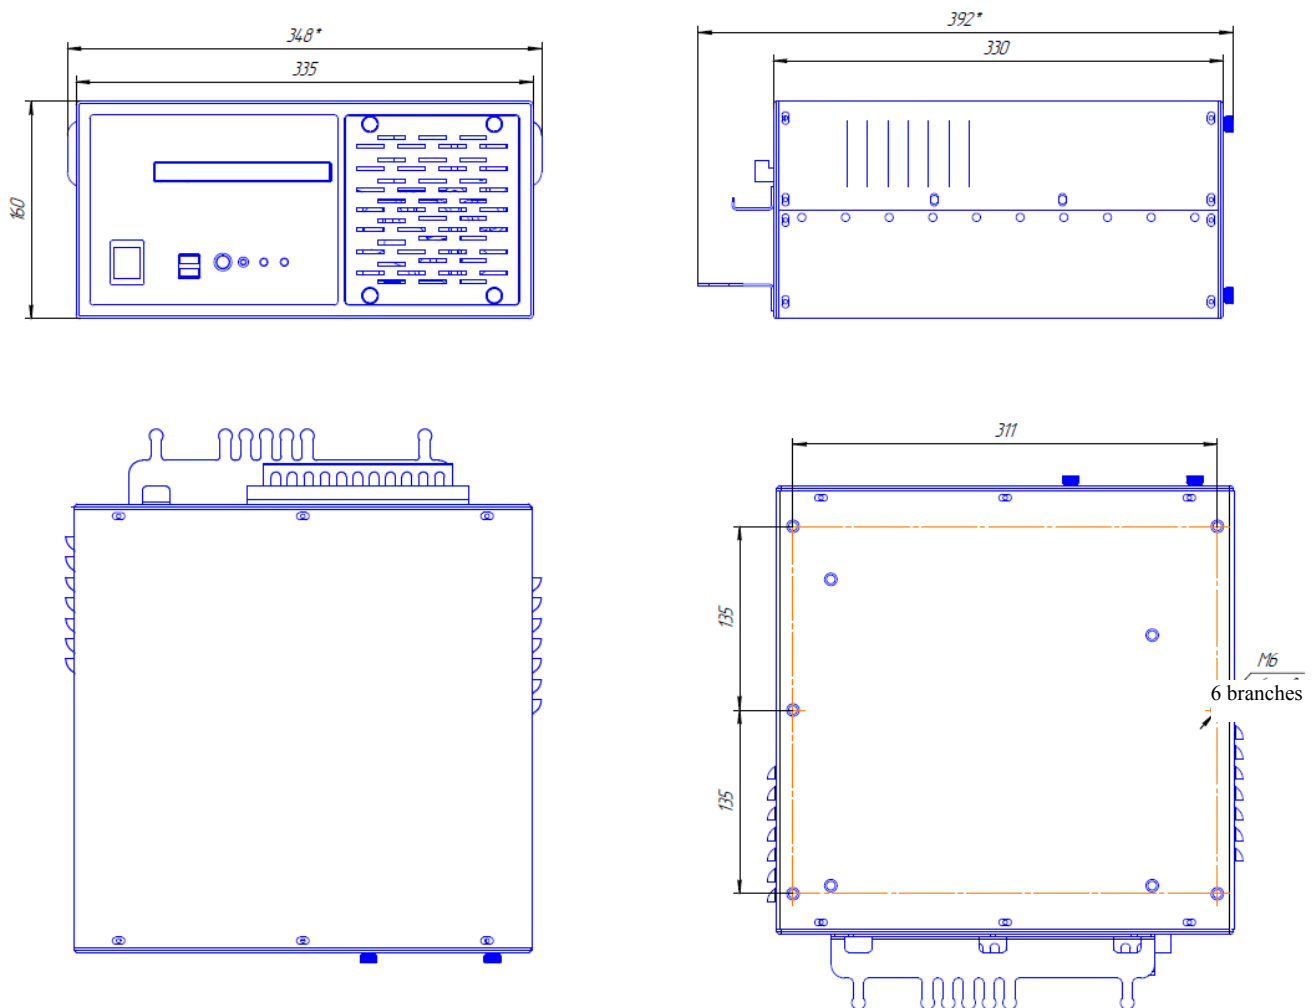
Dimensional Drawing of the Mainframe without Brackets
